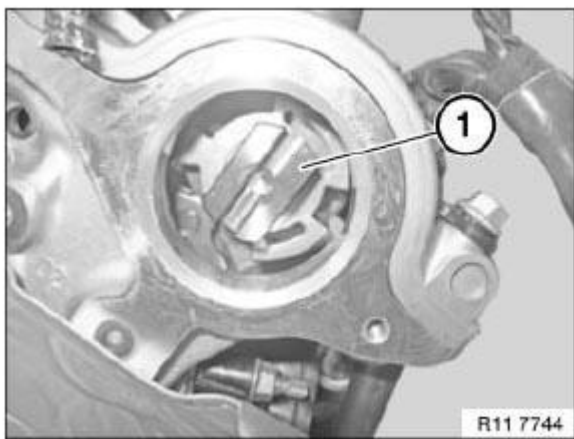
Aligning Vacuum Pump Drive To Groove Of Intake Camshaft
